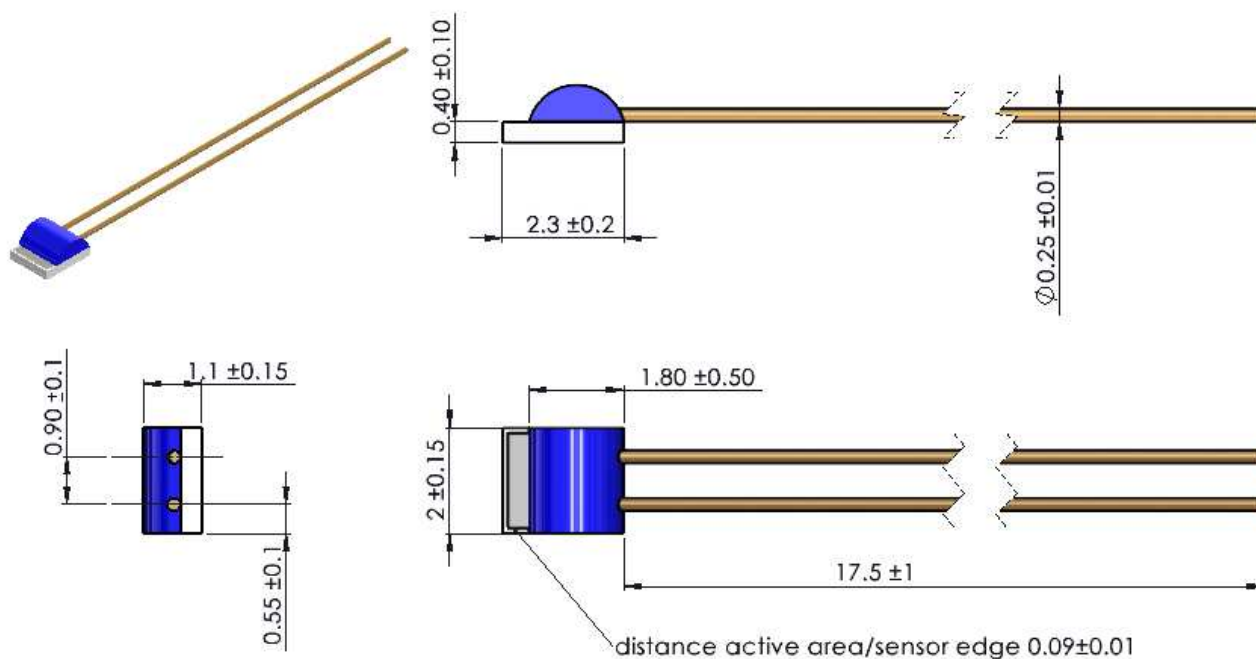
Mechanical dimensions of Platinum Temperature Sensor
